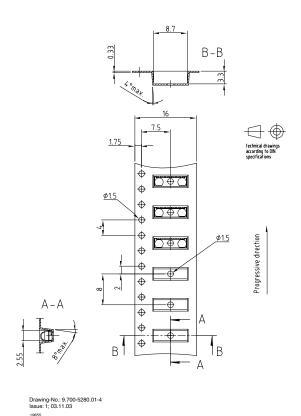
Tape for 2.5 - mm Package Top View Oriented
